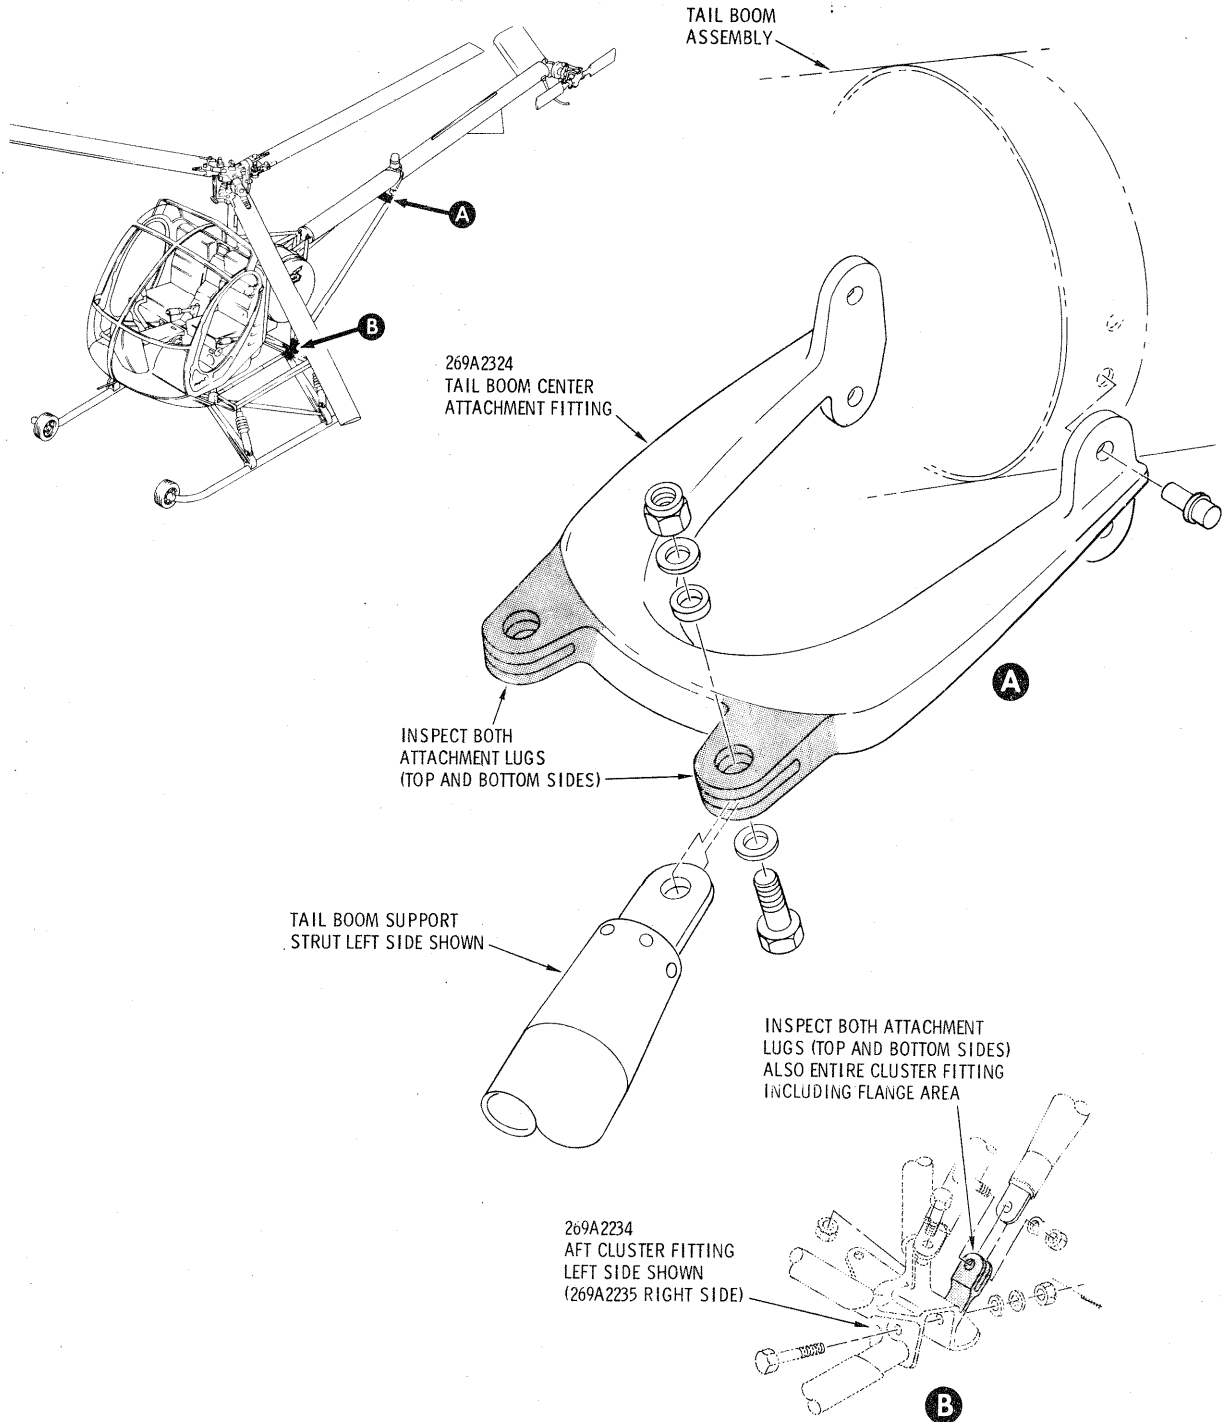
Inspection - tailboom center attach fitting, and center frame section aft cluster fittings
